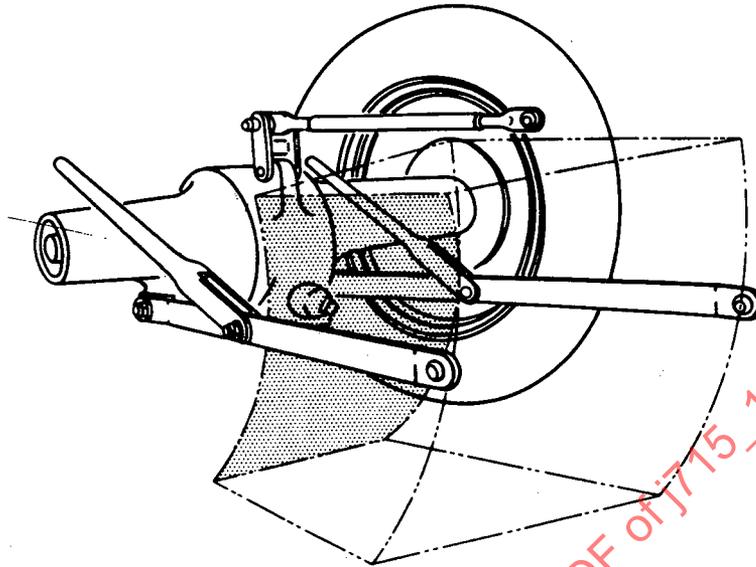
LOWER HITCH POINT TRACTOR CLEARANCE
